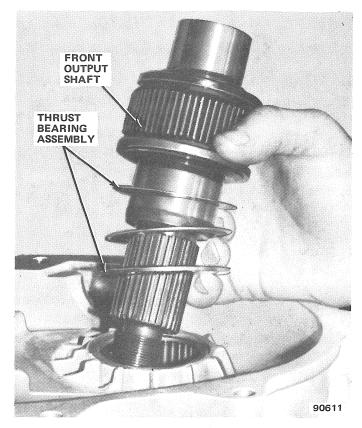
D-16 Front Output Shaft and Front Thrust Bearing Assembly Removal/Installation
